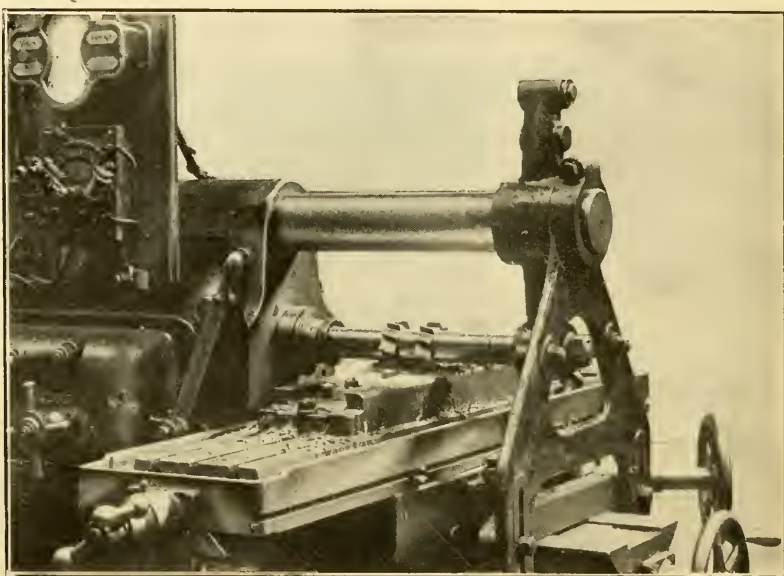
NEW STYLE GANG AT WORK ON STEEL
